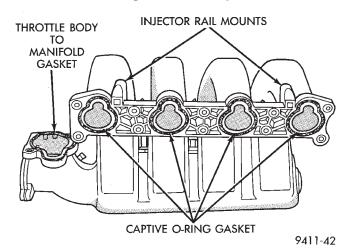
Intake Manifold O-Rings—2.0L Engine EXHAUST MANIFOLD
